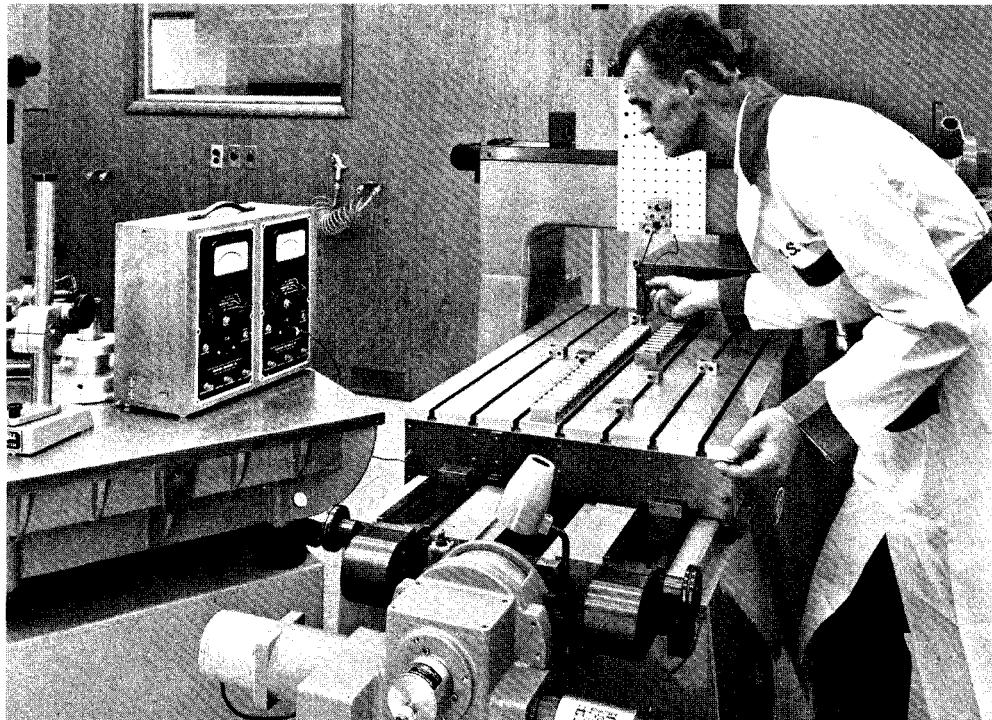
The 72-inch Single Axis Measuring Machine has the capacity to measure lead screws, end standards, and line standards up to 72 inches in length [in metric 1830 mm]. A unique disengageable "nut" allows the carriage to be moved
